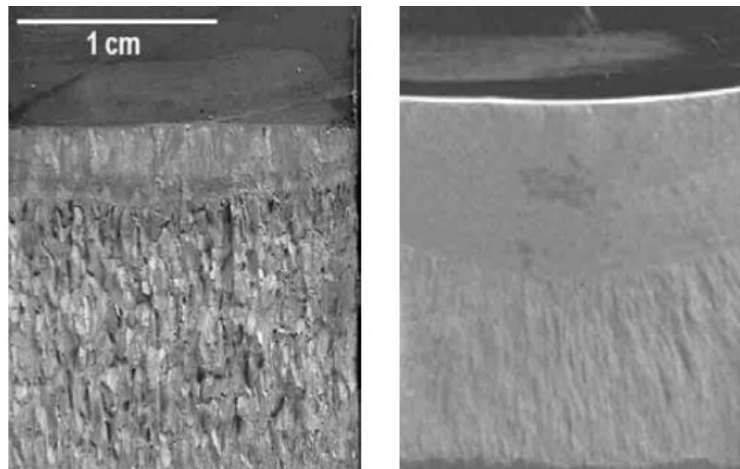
Fracture surfaces of toughness specimens [29]
